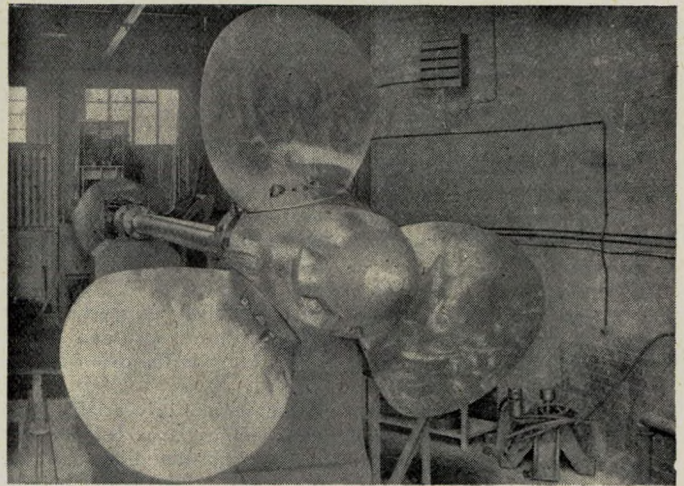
General view of the latest Rotol controllable-pitch screw
